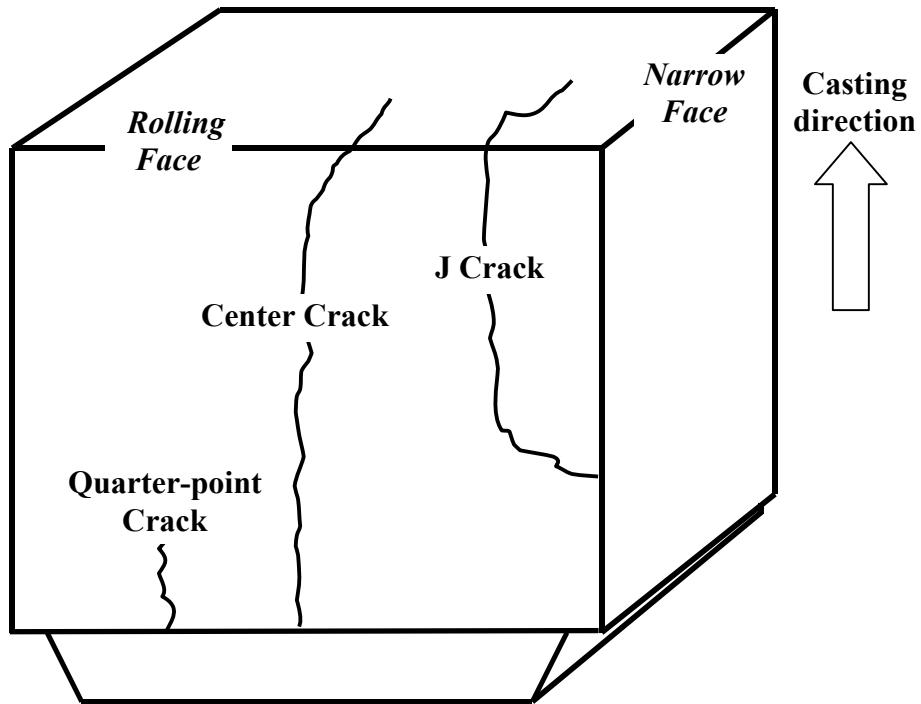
Schematic of crack defects related to secondary cooling during D.C. casting of aluminum^[54].
